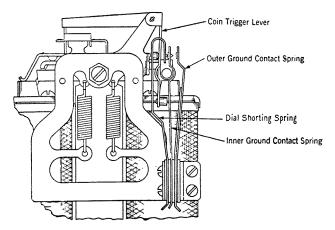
3-spring (Dial Shorting) Relay—Contact Spring Guard Cut Away
